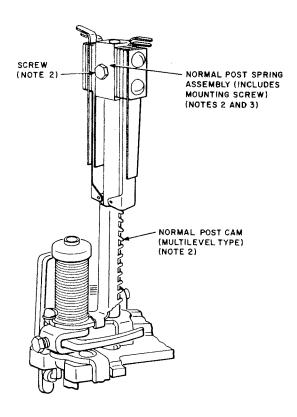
Normal Post Spring Assembly and Associated Parts
